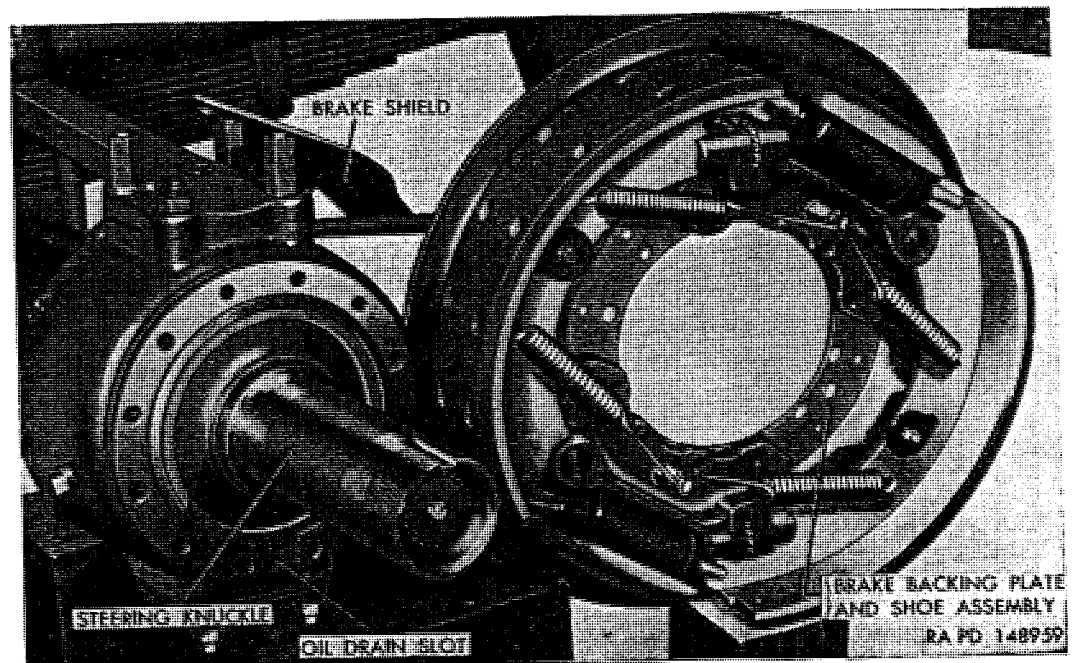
Brake backing plate and shoe assembly removed showing steering knuckle.
